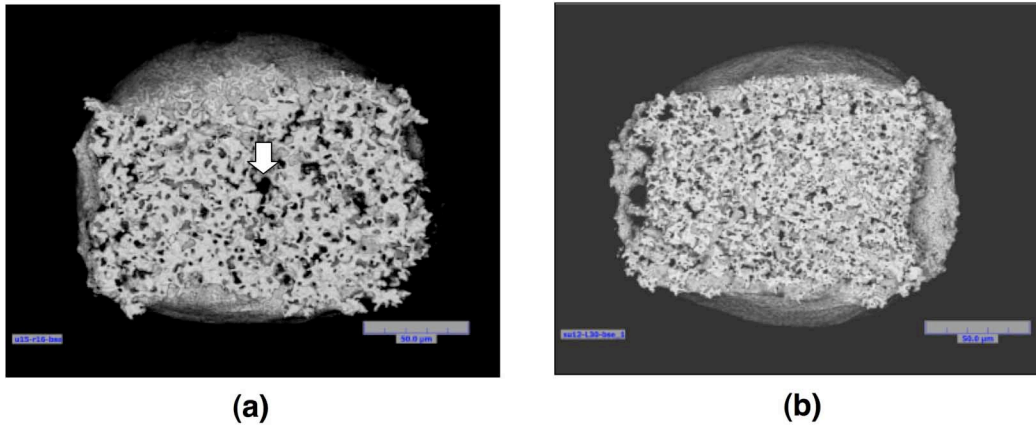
Scanning electron microscopy (SEM), backscattered electron (BSE) images of the TKN/LTCC fracture surfaces of solder joints referencing the as-fabricated condition: (a) DuPont™ test vehicle, die U15, joint L16 and (b) Scrantom test vehicle, die U12, joint L30. The white arrow in (a) exemplifies a void.
